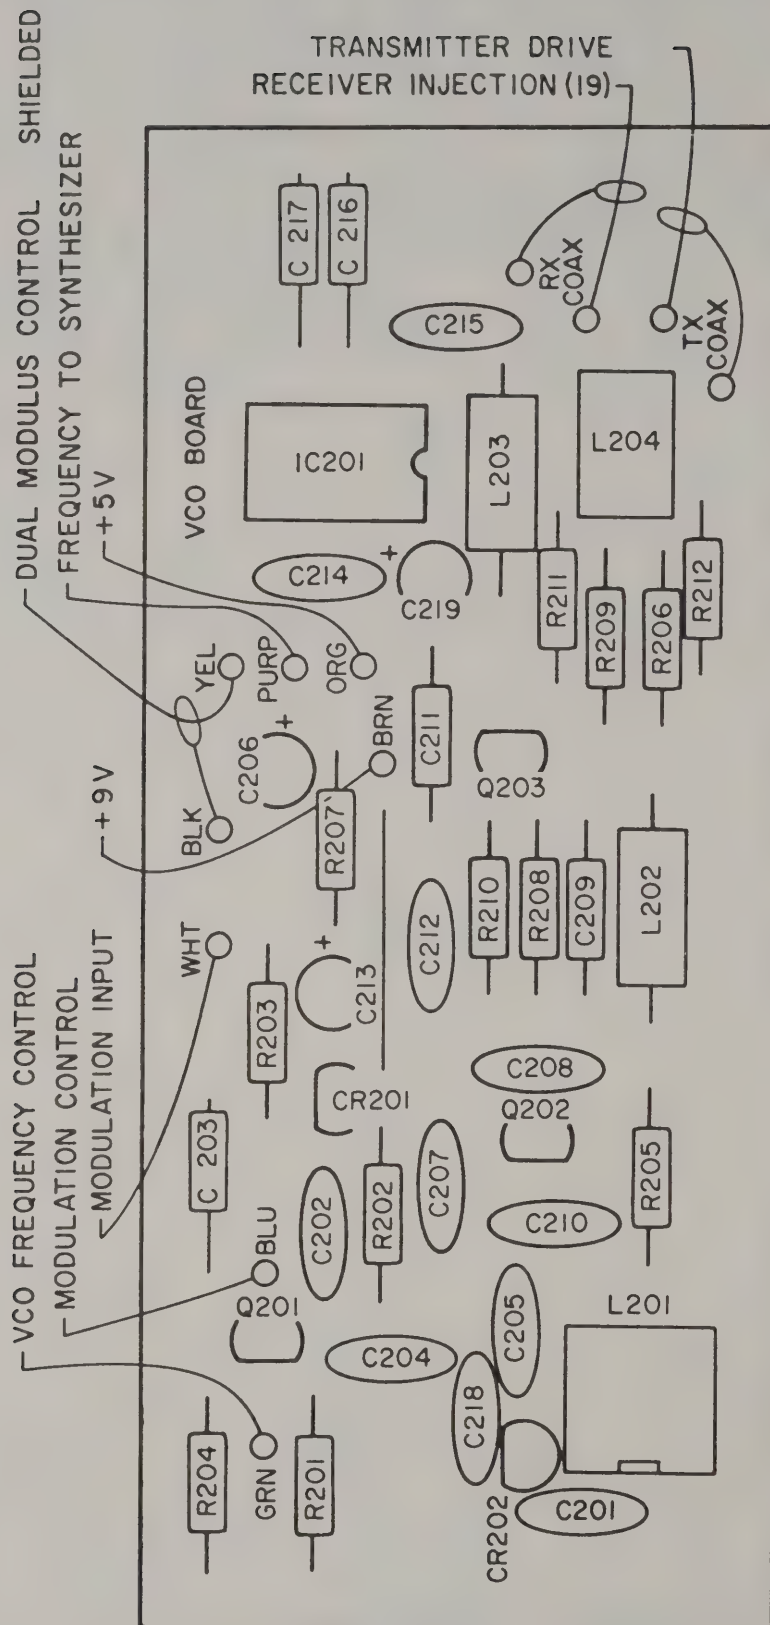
A. Parts Placement, VCO PCB Assembly; Top View.
